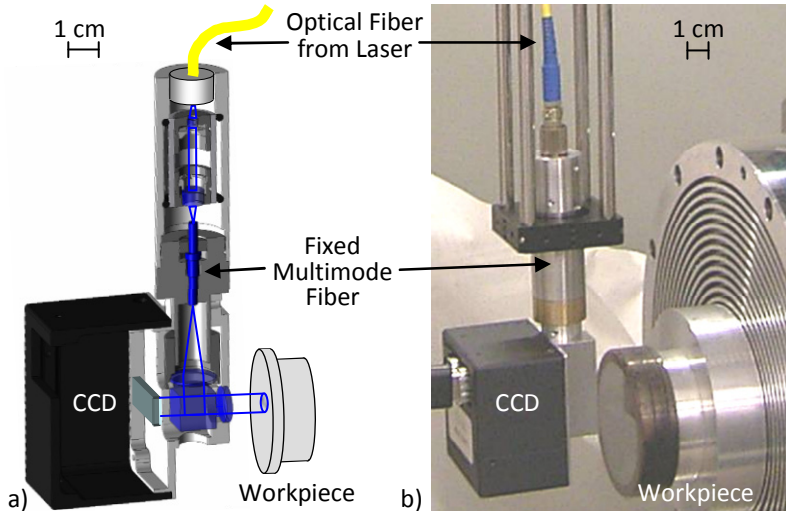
Compact measuring device for in-situ roughness measurements a) as a sketch and b) integrated into a machine tool
